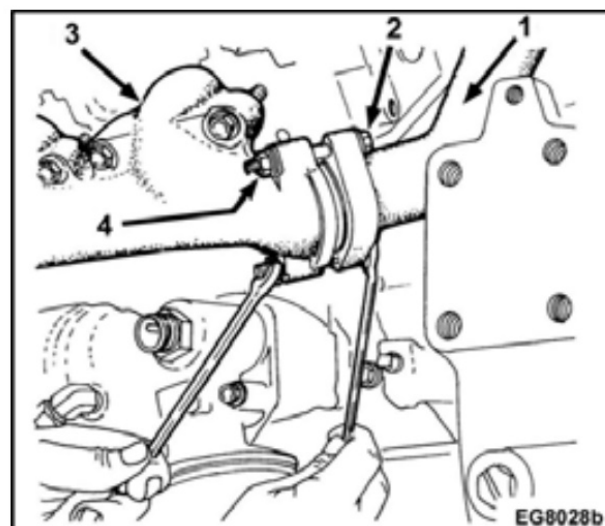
Removing Left Exhaust Tube Mounting Hardware at Exhaust Manifold
